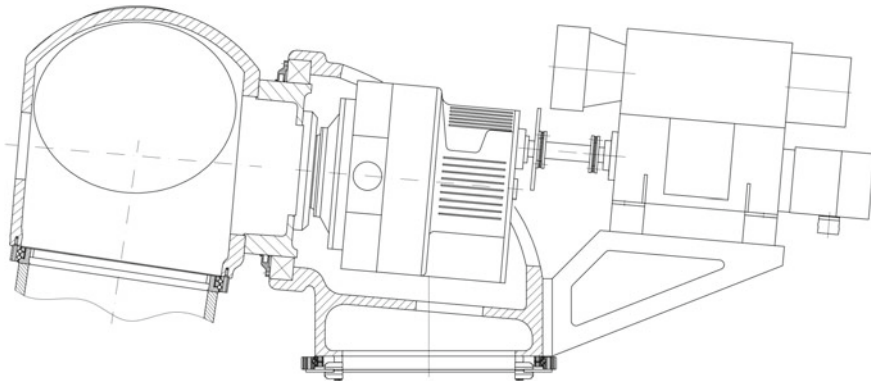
Drivetrain concept with moment bearing [aerodyn]
